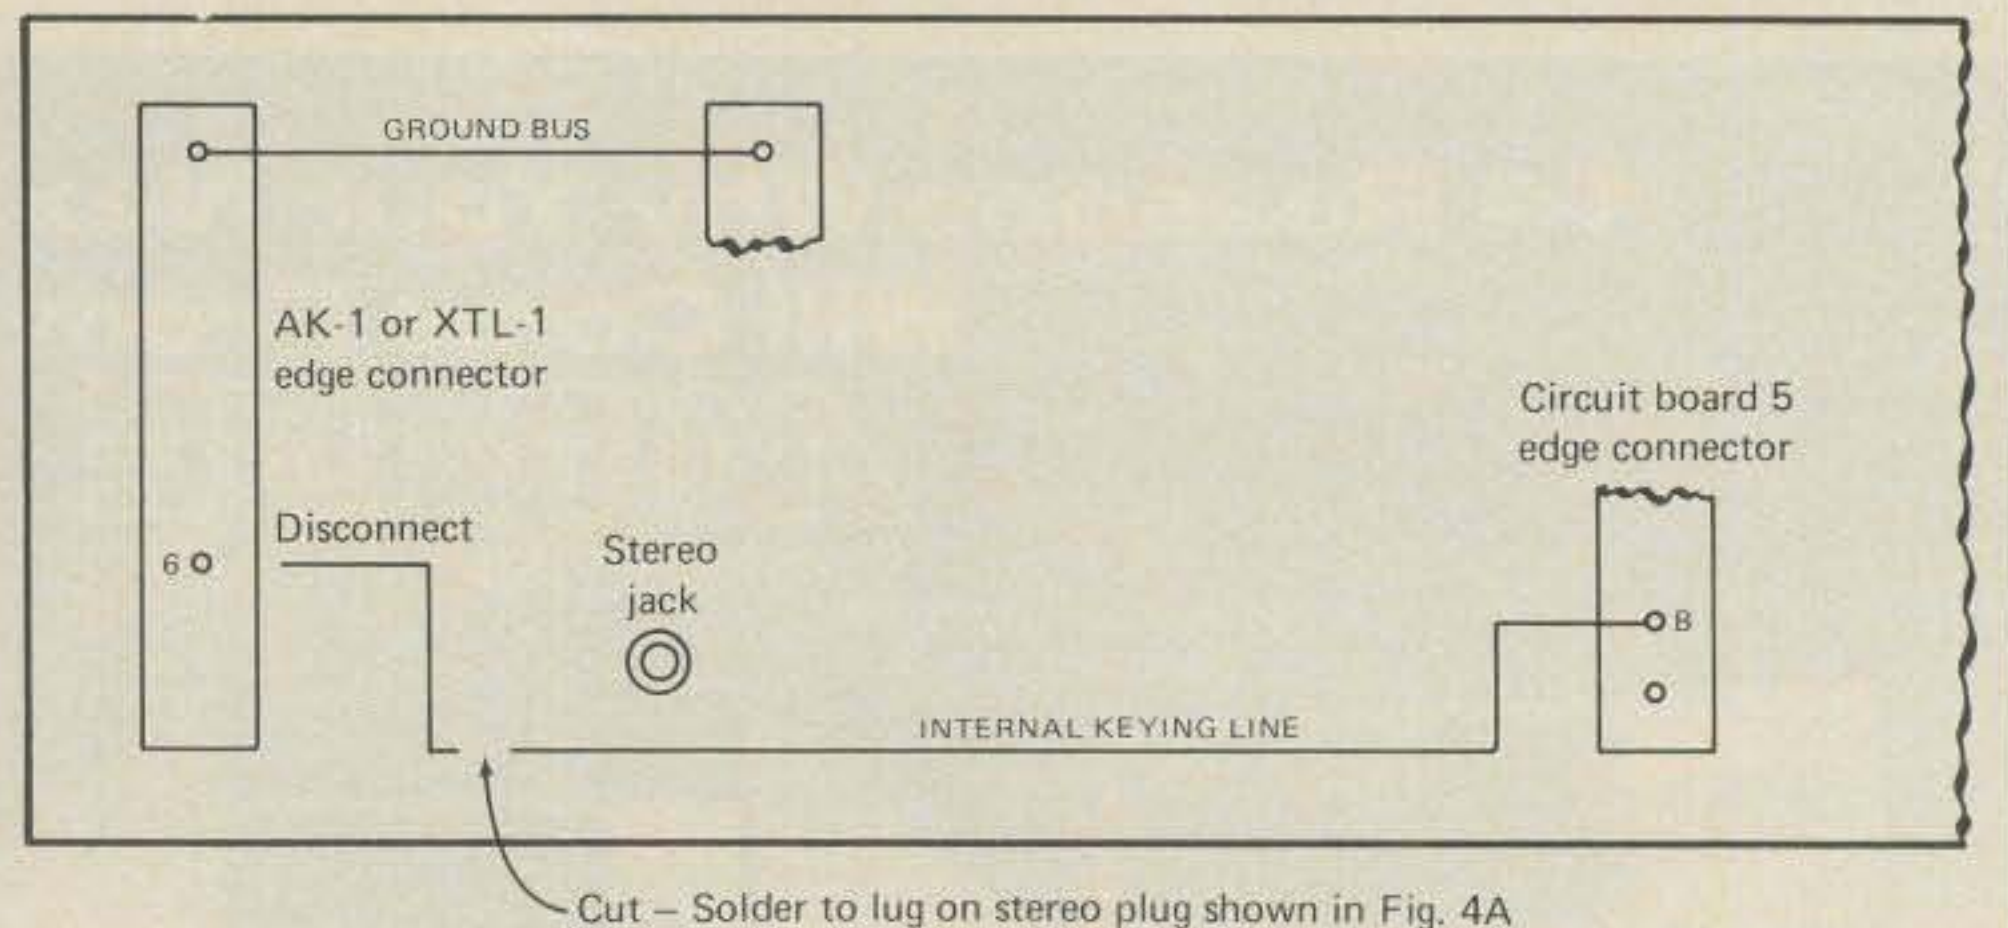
This drawing shows the location of the internal keying line to pin 6 of AK-1 or XTL-1 which must be connected to the stereo jack as shown in fig. 4(B).
